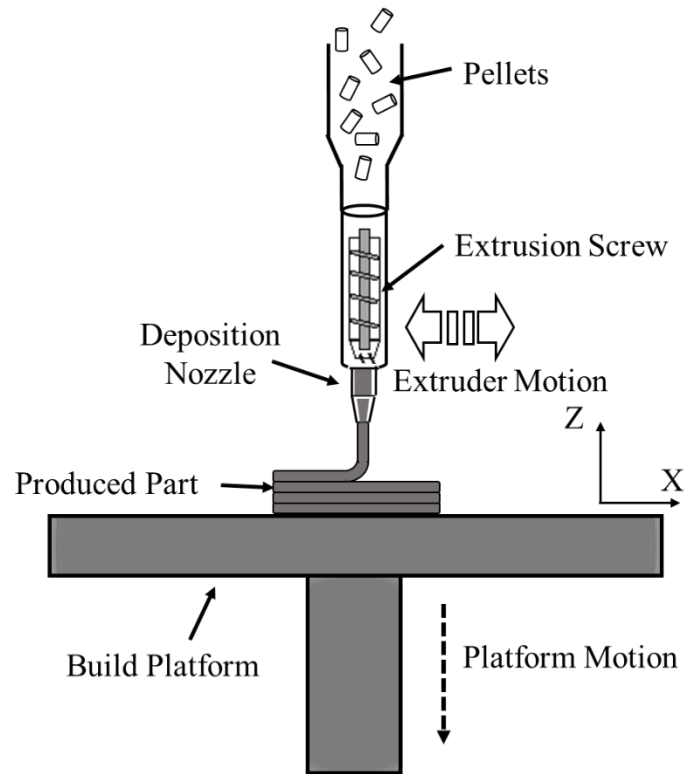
Schematic of AM process. Pellets undergoes through extrusion screw and nozzle to create bead and parts are fabricated by depositing layers/beads in Z-direction.
